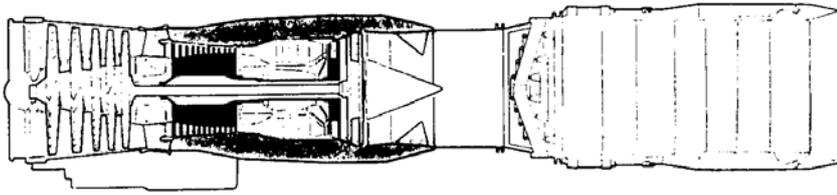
(a) Diagram showing the principal parts of a gas turbine.
